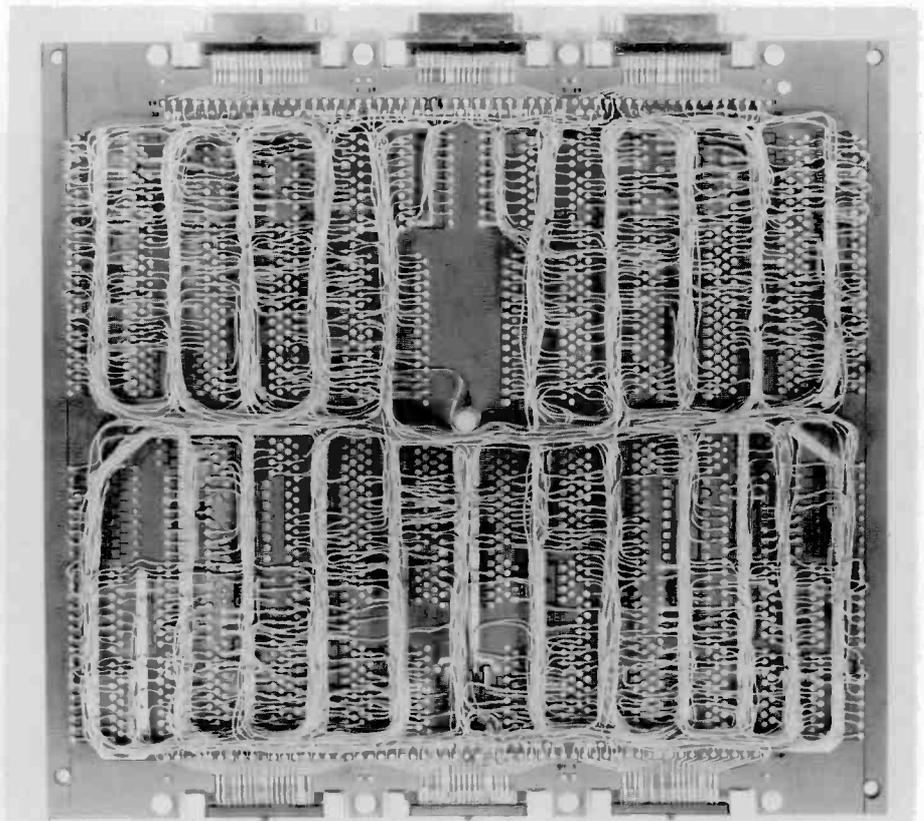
Welded wire board showing layout of wires and buttonhead pin terminations.
